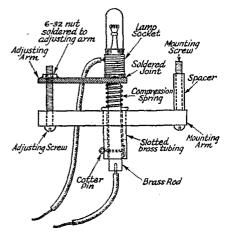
Method of mounting the lamp for the lightbeam transmitter to provide vertical adjustment for alignment of the lamp filament with the the center of the optical system. This assembly is mounted in a sliding tube at the eyepiece end of the telescope; another sliding tube carrying the eyepiece fits into the lamp-assembly tube behind this mounting. The eyepiece tube is slotted on one side so that it will clear the lamp mounting.
